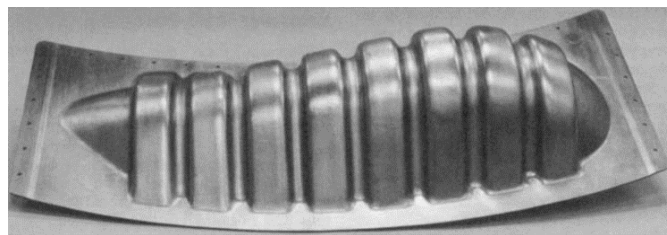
Superplastically formed TA6V engine nacelle component for the Boeing 757 from a single sheet [14]
